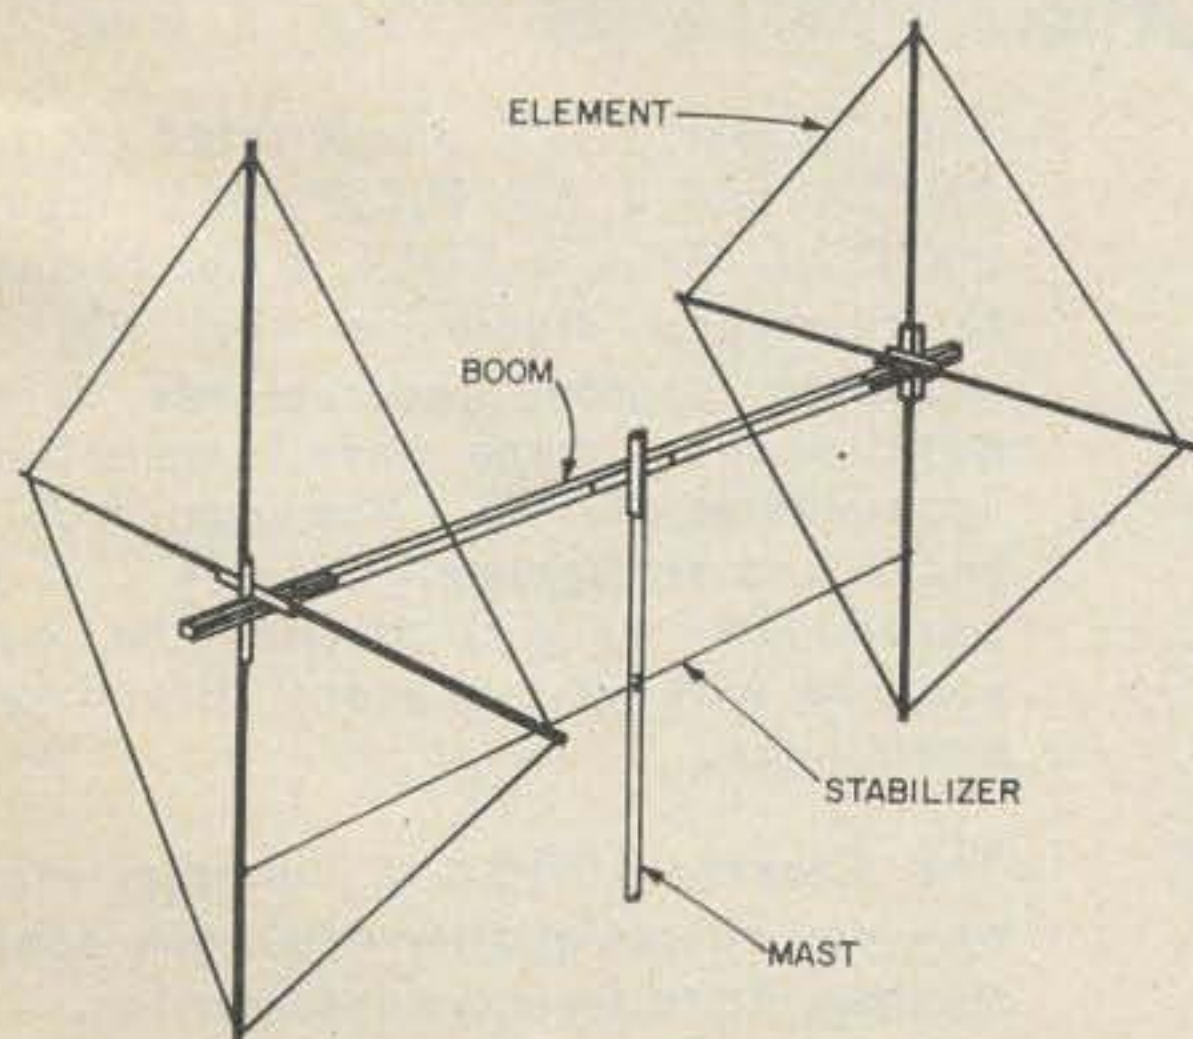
Overall view of the two element quad showing the layout of the boom, mast and stabilizer.
